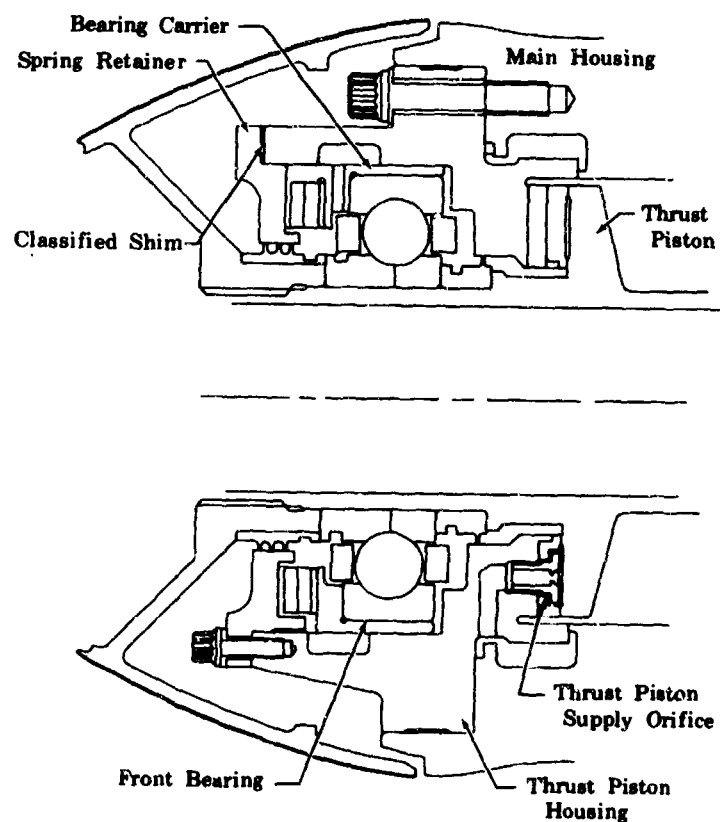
Fuel Low-Speed Inducer Thrust Piston FD 33413 and Front Bearing Arrangement
